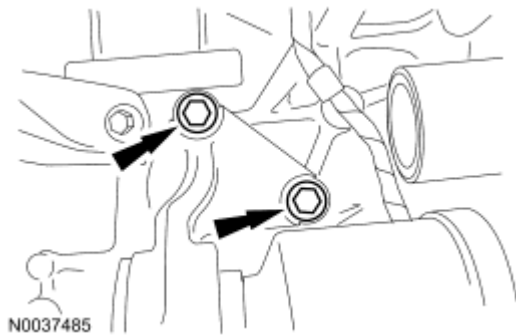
Locating RH Halfshaft Carrier Bearing Bracket Bolts
